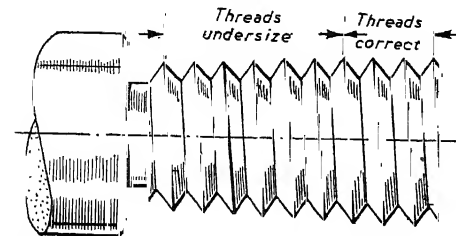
Tapered thread, acceptable to ring gauges, although the rear threads are undersize. The error is disclosed by the thread caliper gauge.
